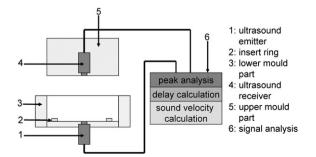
Set up of the mould equipped with the ultrasonic online control.
